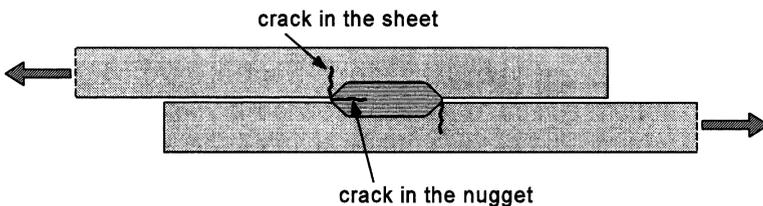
Cracks in a spot welded joint.s
